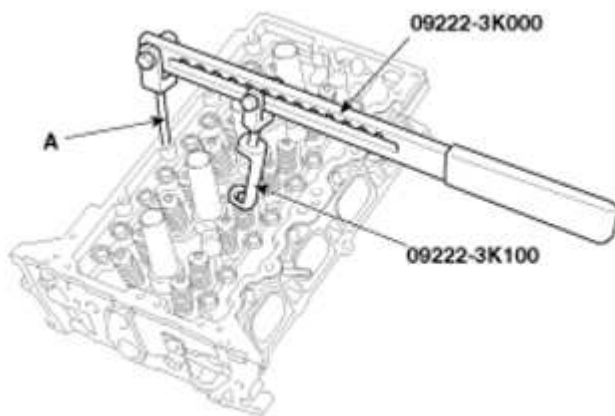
Compressing Spring Using SST (09222-3K000, 09222-3K100)
